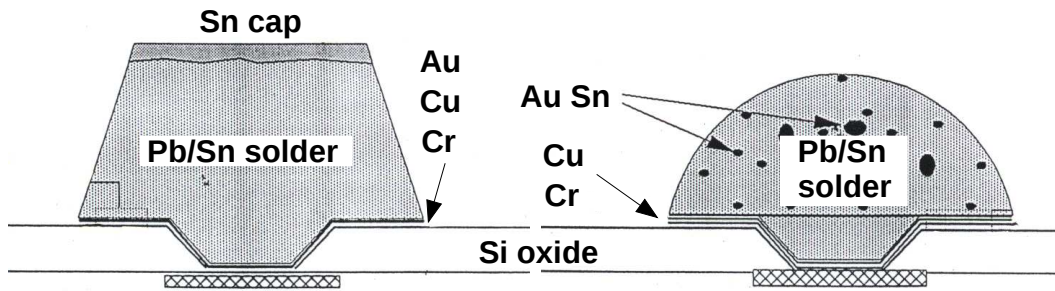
Principle of the C4 bump bonding technology by IBM. Left: solder deposited on bond pad. Right: bump after thermal re-flow, ready for the connection to the hybrid component [89].
